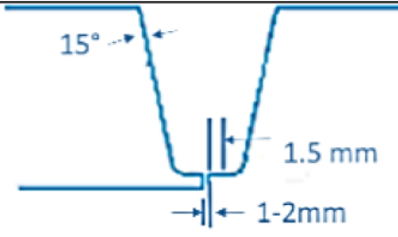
Sketch of the girth weld used for the project with dimensions.
